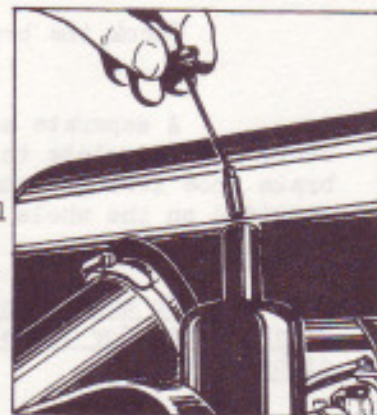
CARBURETTER AIR VALVE DAMPER.
